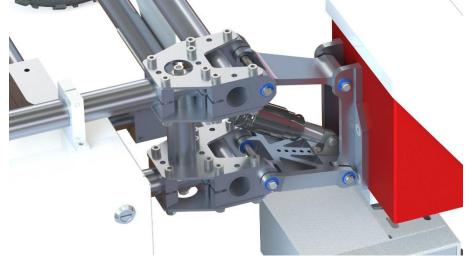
Using plasma cut top and bottom plates together with purchasable aluminum clamps, it is possible to create a more lightweight, simple and cheaper T-connection solution.
